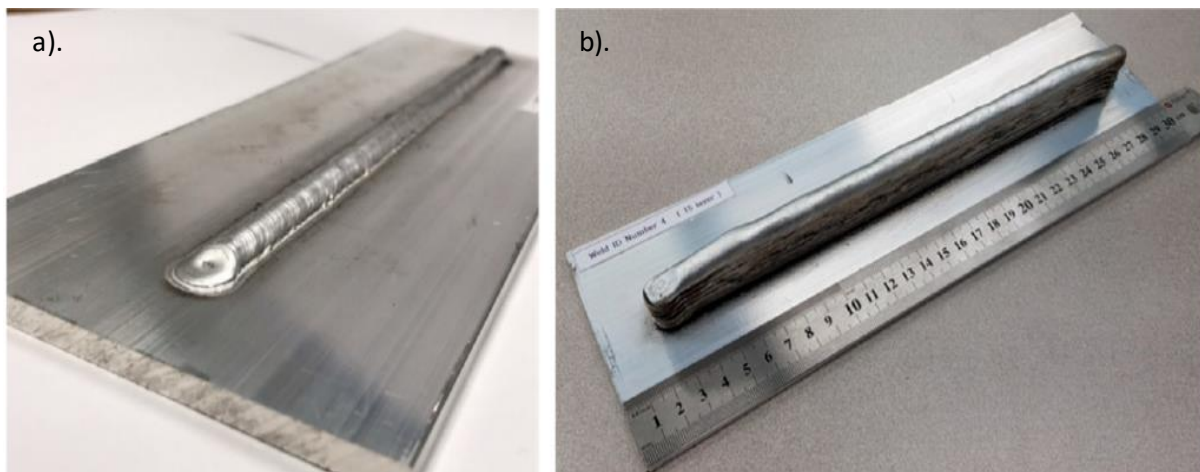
a). A single aluminium weld bead, b). a series of stacked weld beads atop one another [53]. This technique of material deposition is the basis for much of additive manufacturing, where deposited material is “welded” together with a laser.
